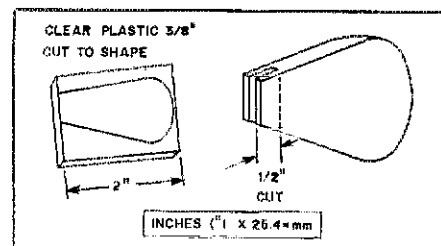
Cut paddle grip from 3/8-in. plastic as shown. Dimensions shown are representational; the precise size and shape should suit the taste of the builder.
